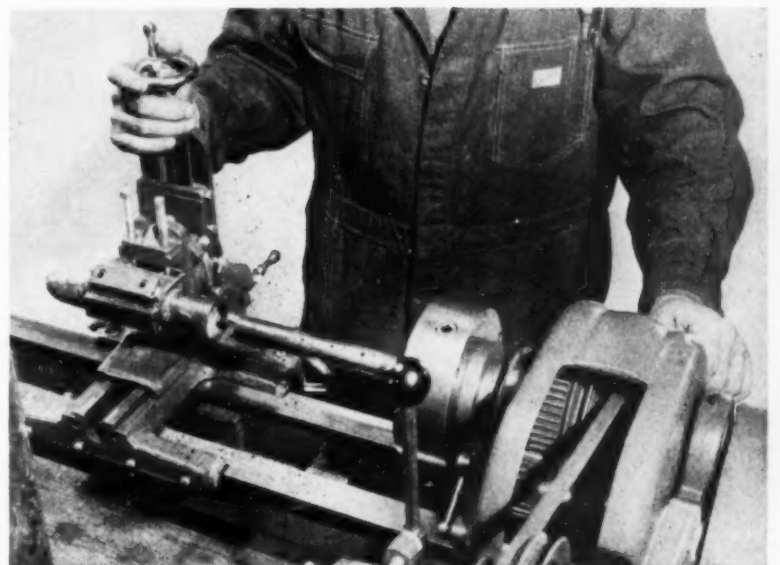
VIBRATOR HOUSING is set up in lathe for reborer, after replacing worn metal with an external layer of stellite, welded on. Housing at left; cutting tool at right.
